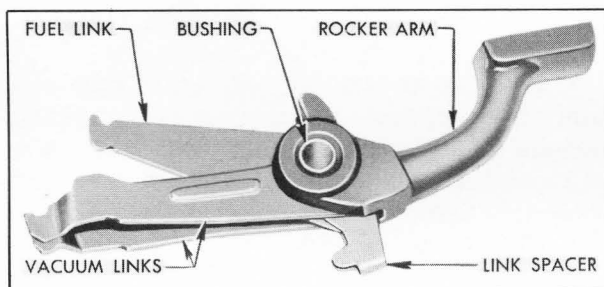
Links, Spacer, Rocker Arm, and Bushing Assembled
